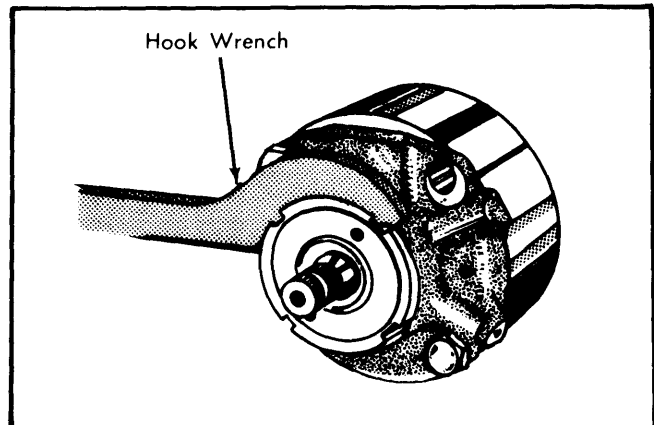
Removing Slotted Nut with Special Hook Wrench
